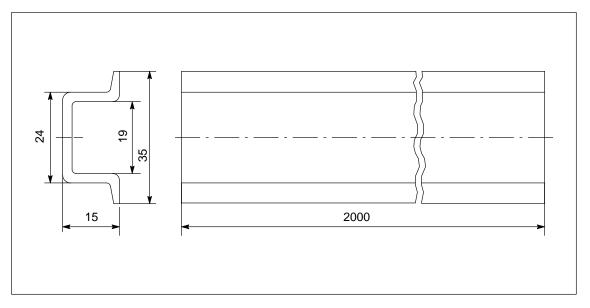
Dimension Drawing of the 2000 mm Standard Rail
